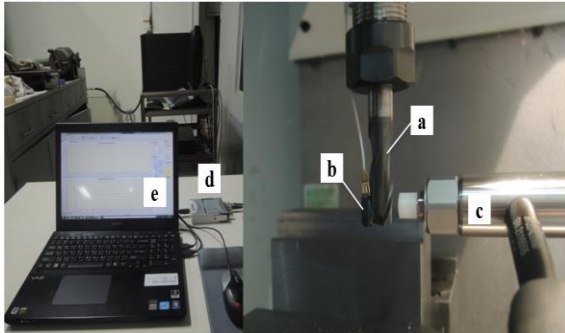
Setting of machine tool dynamic structure measurement; (a) tool, (b) acceleration sensor, (c) force sensor, (d) signal processing box, and (e) Cutpro™ software.
